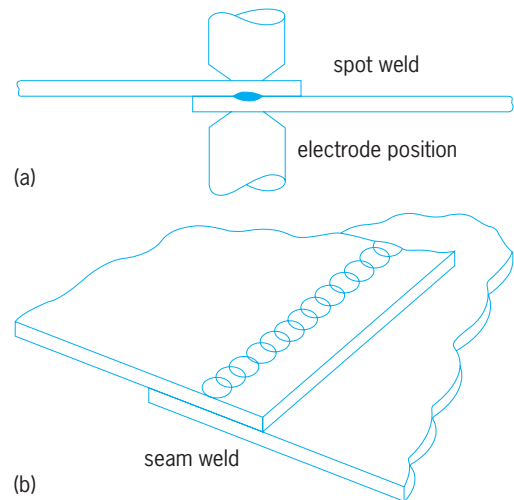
Common electrical-resistance welds. (a) Spot weld, used mainly for thin sheet stock. (b) Seam weld, used to weld butted edges of pipe or tubing.
